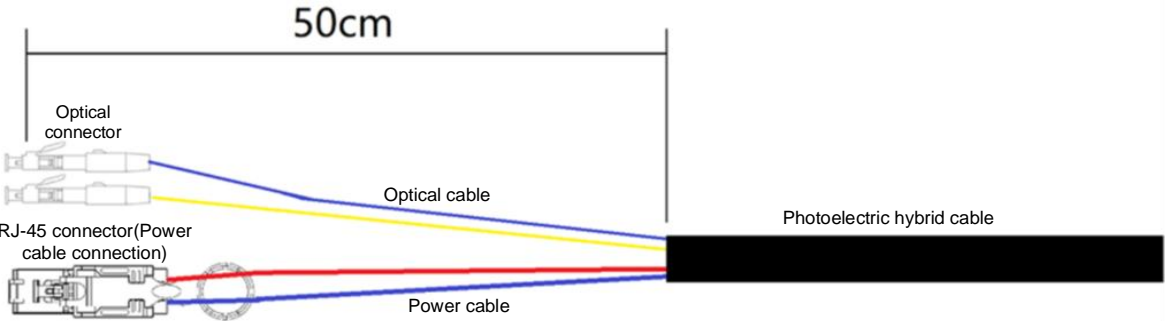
shows the connector assembly of the optical cable and power cable in the photoelectric hybrid cable.
